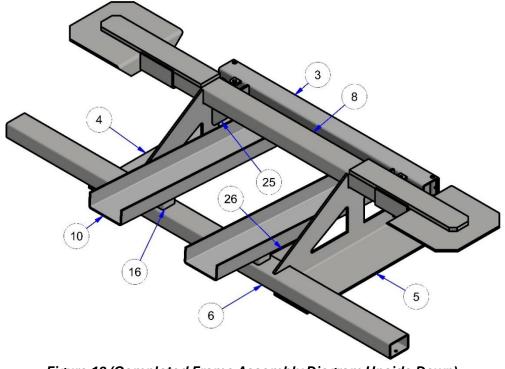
(Completed Frame Assembly Diagram Upside Down)
